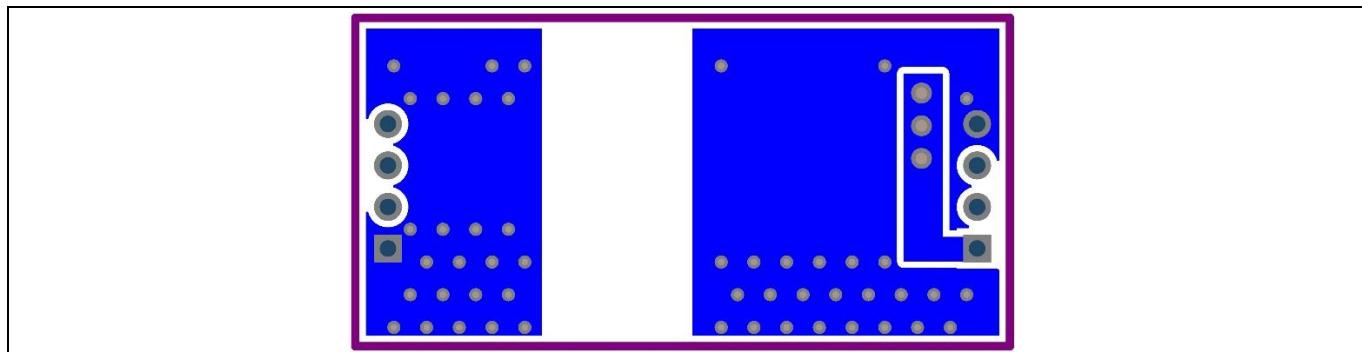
Bottom view of PCB for CT gate driver design with 1ED3124MC12H (X3 Compact)
